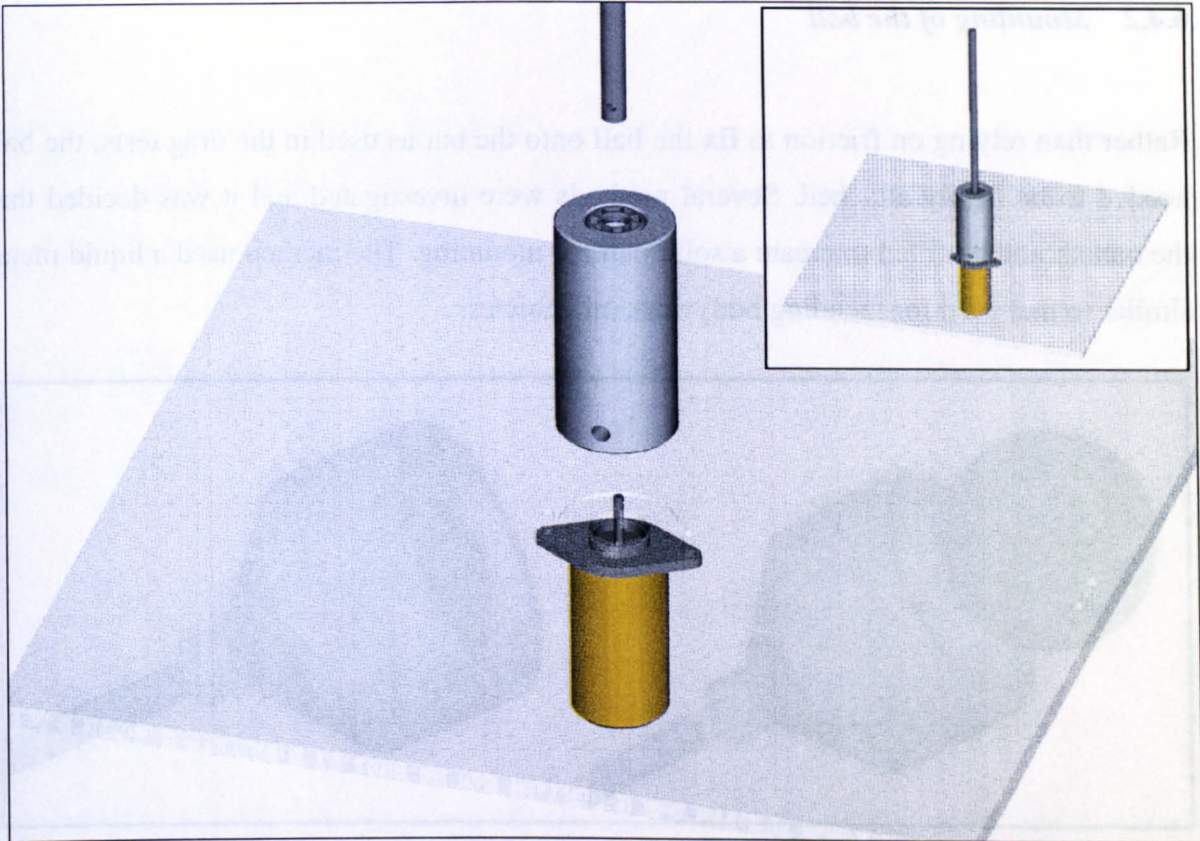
Exploded view showing the sting assembly used for mounting the balls. Inset shows fully assembled apparatus.
